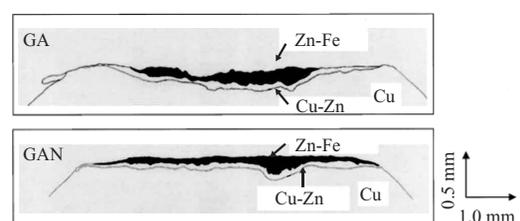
Cross section of electrode after consecutive spot welding test (2 500 times)
